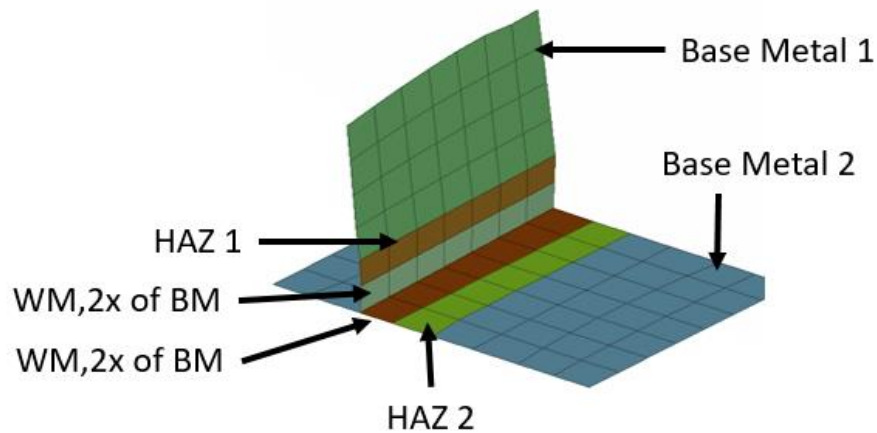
Weld Metal(WM), HAZ and Base Metal(BM) representation using shell method
